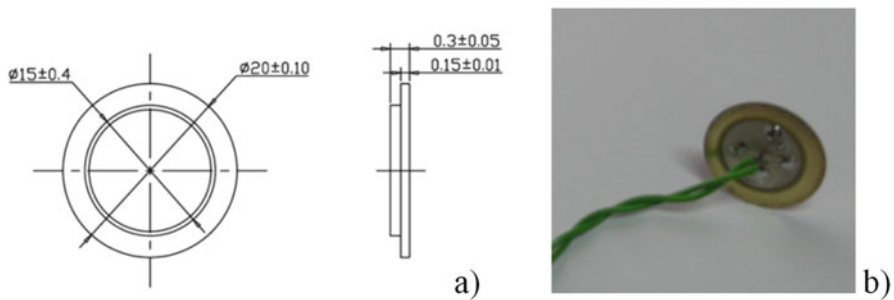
Sound transducer LD-BZPN-2030: (a) dimensions of the components, (b) real element
